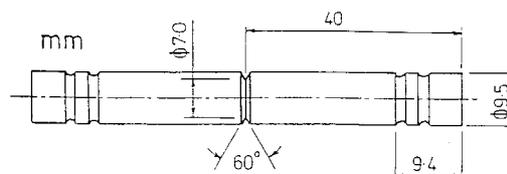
Cylindrical notched test (CNT) specimen. All dimensions in mm.
